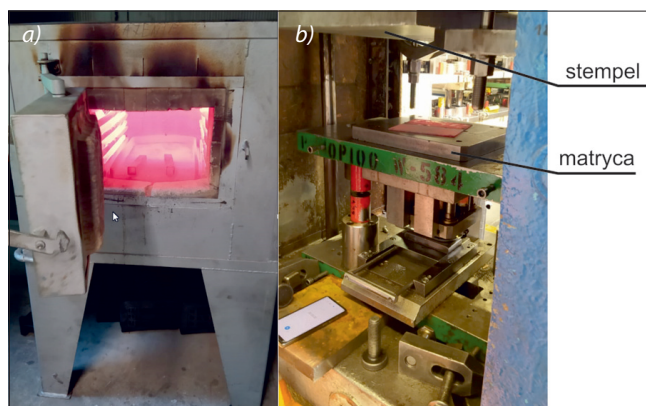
Hardening process: a) hardening furnace for heating welded blanks, b) a die and a punch for the blank to hardening test
